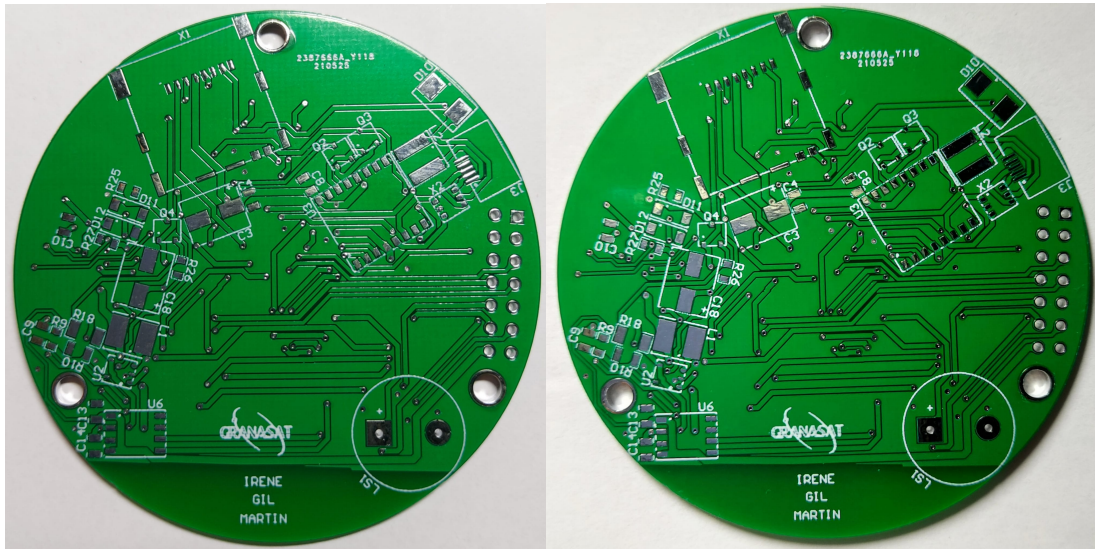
GranaSAT CanSat Main Board PCB manufactured in the laboratory
